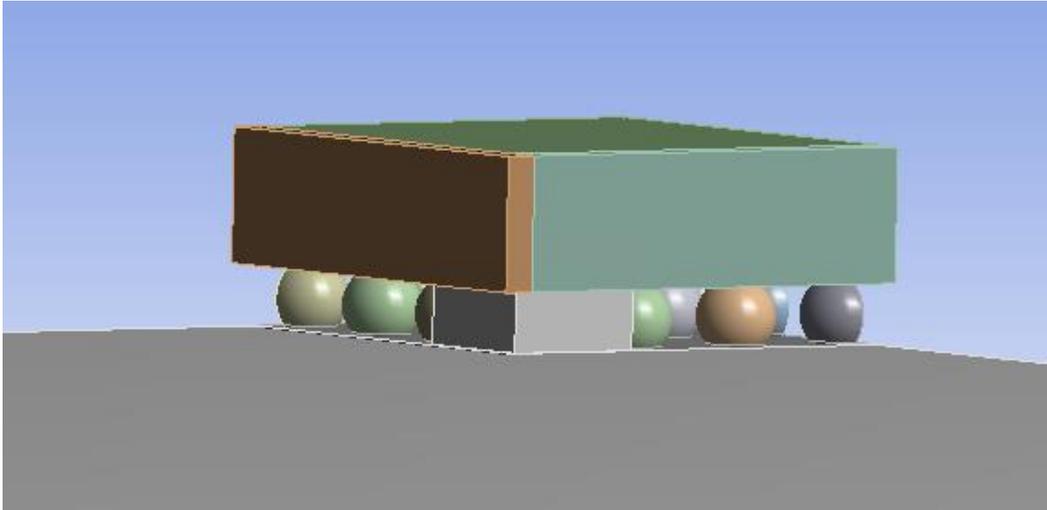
CORNER SOLDER UNDERFILL LAYOUT
